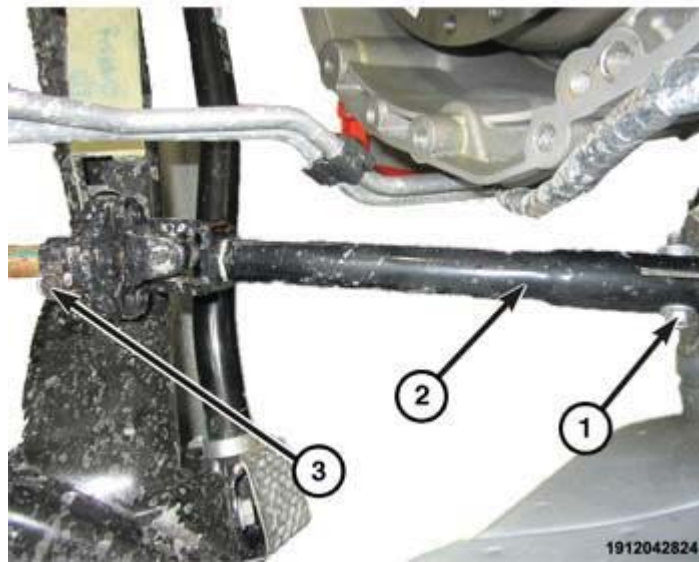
Lower Intermediate Shaft To Upper Intermediate Shaft Bolt, Lower Intermediate Shaft & Lower Intermediate Shaft To Steering Gear Coupling Bolt
